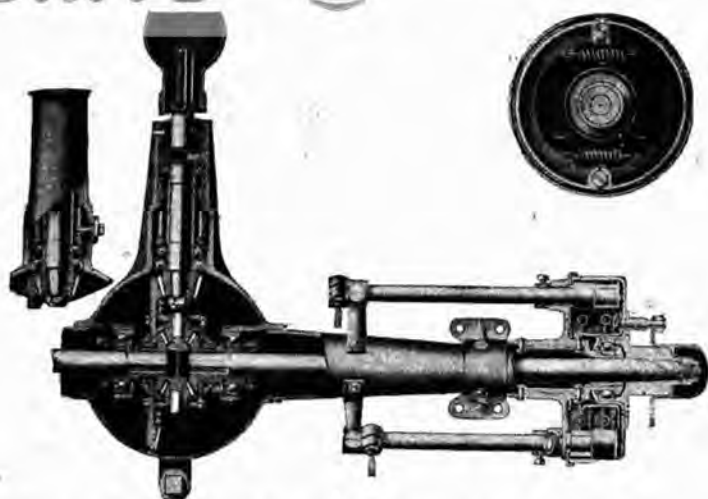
Part section of the torque tube and back axle assembly, showing the final drive and brakes.
